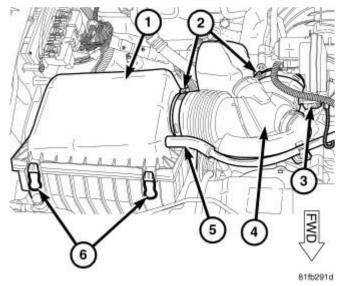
Air Filter Housing Courtesy of CHRYSLER LLC
